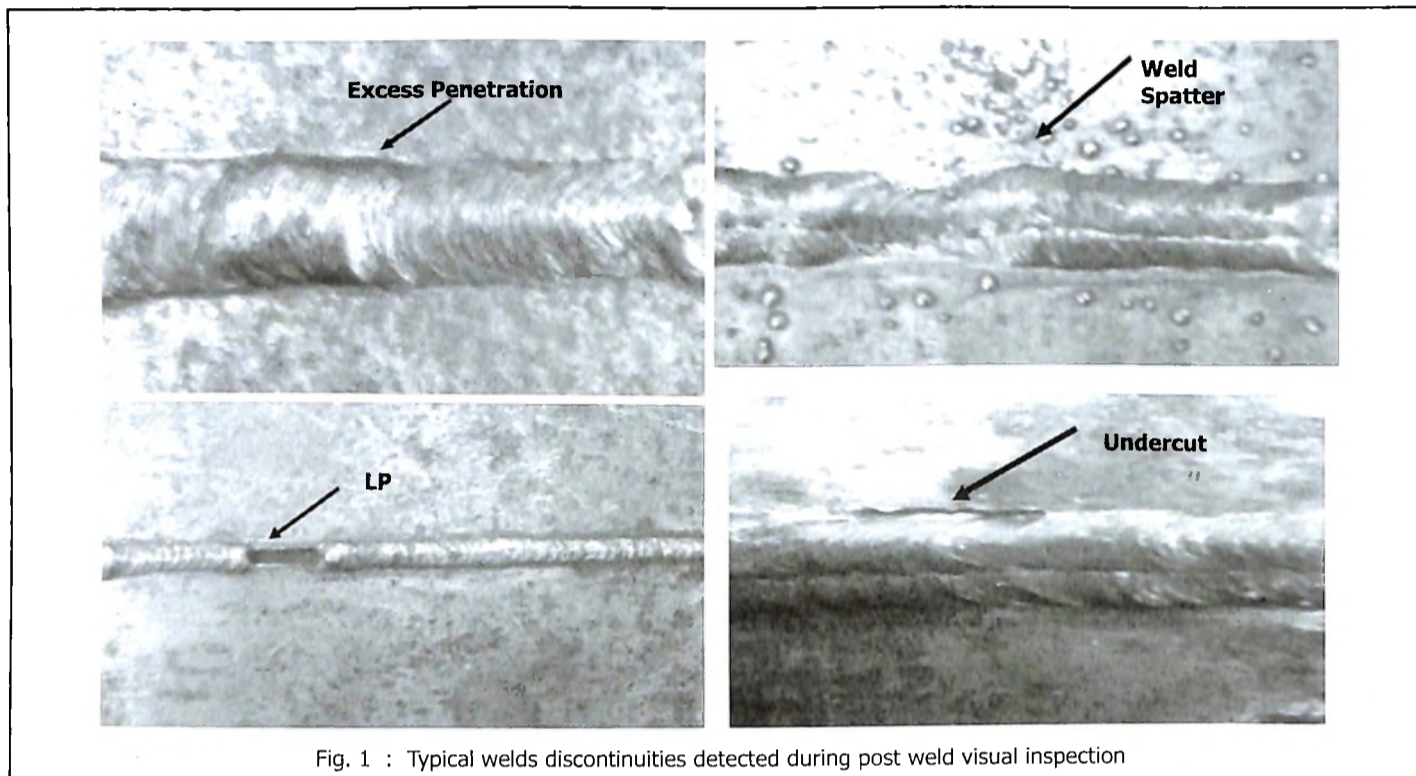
Typical welds discontinuities detected during post weld visual inspection
